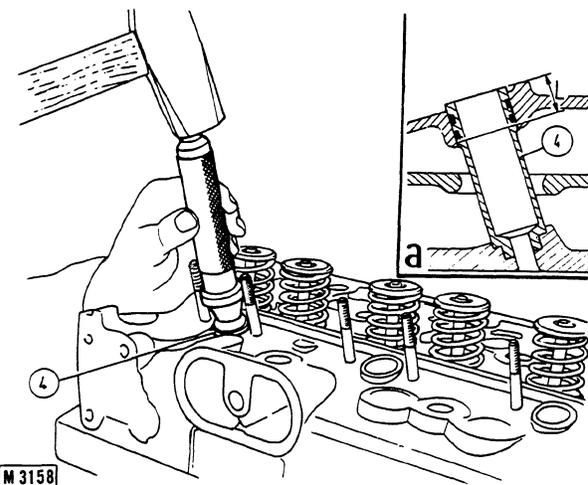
Swaging injector holders (4) with punch 75295632.
